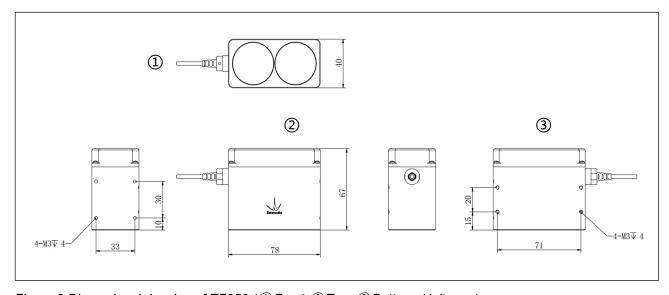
Dimensional drawing of TF350 (Tront; Top; Bottom; Unit: mm)
